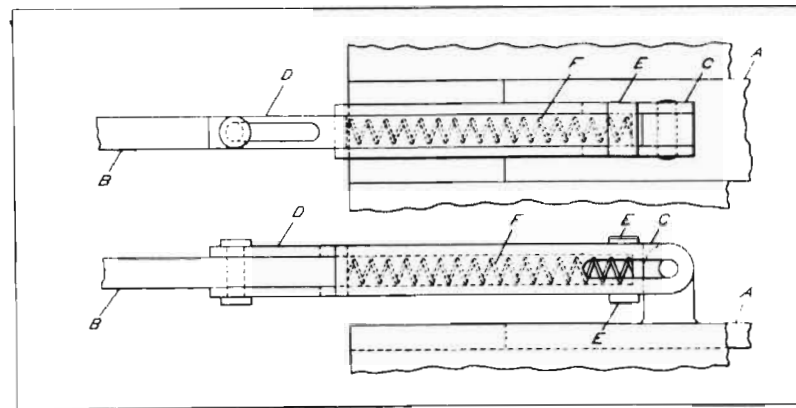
Plan view and front elevation of attachment for eliminating jamming of the machine in the event of a misfeed.
